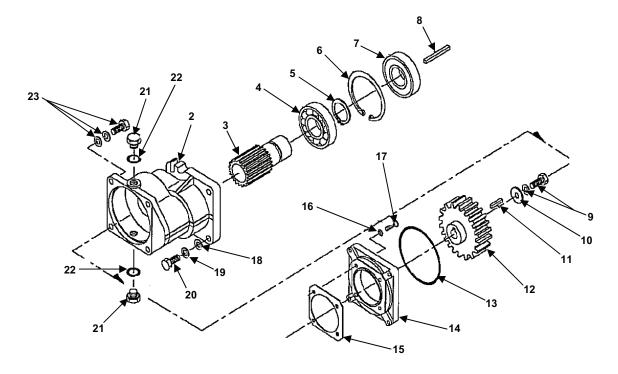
High-Pressure Pump Module Gearbox (Exploded View).
